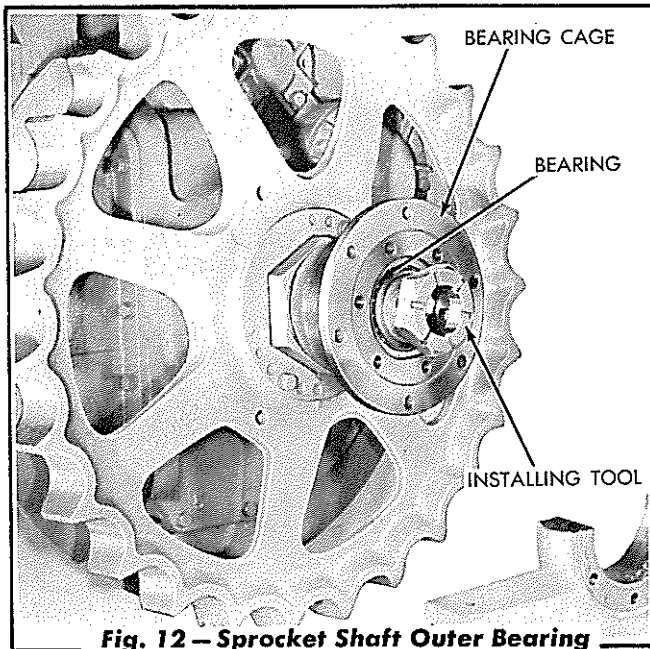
Sprocket Shaft Outer Bearing Installation
